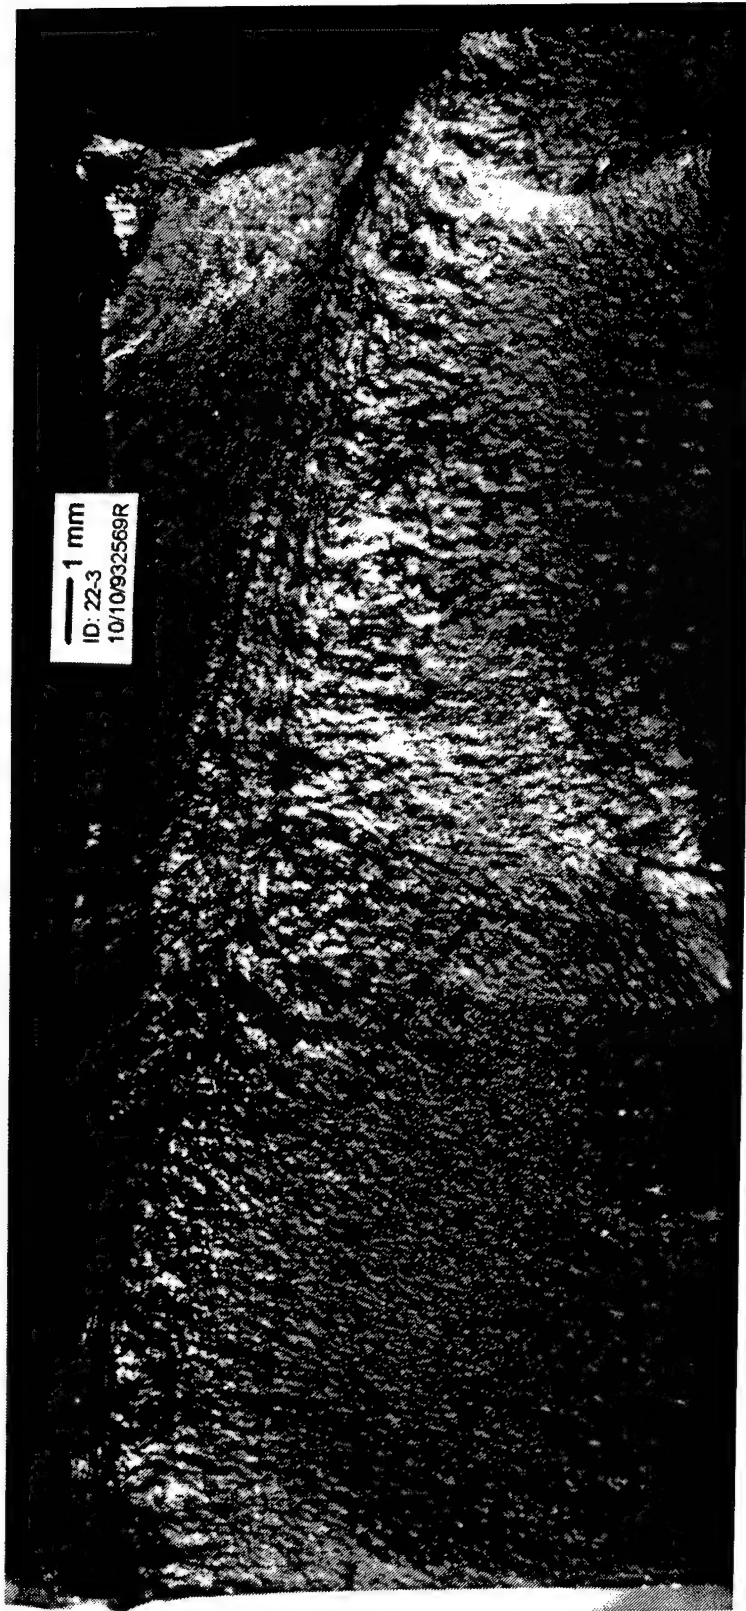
Fatigue fracture surface of the HSLA-80 but weld sample subjected to random loading:
